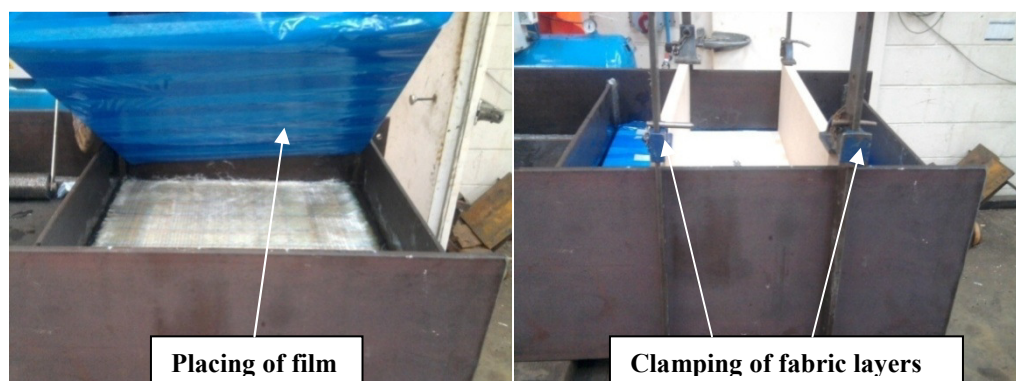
Placing film coating and clamping of glass fabric layers of specimen B7
